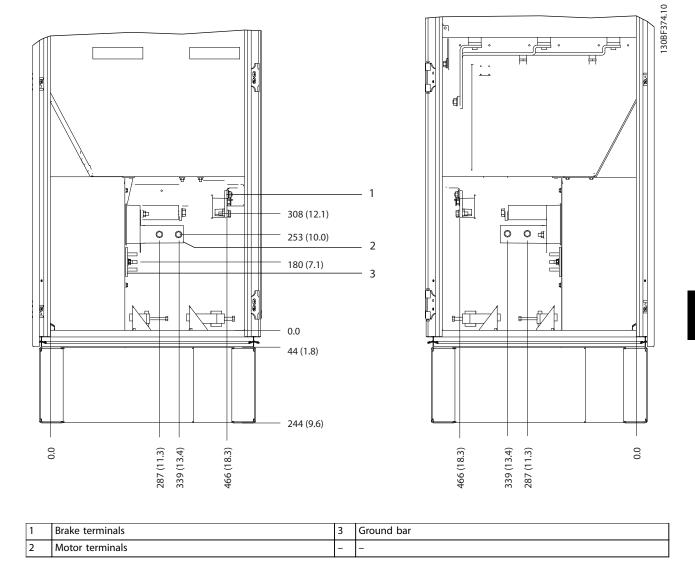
Terminal Dimensions for F10-F11 Inverter Cabinet, Side View
